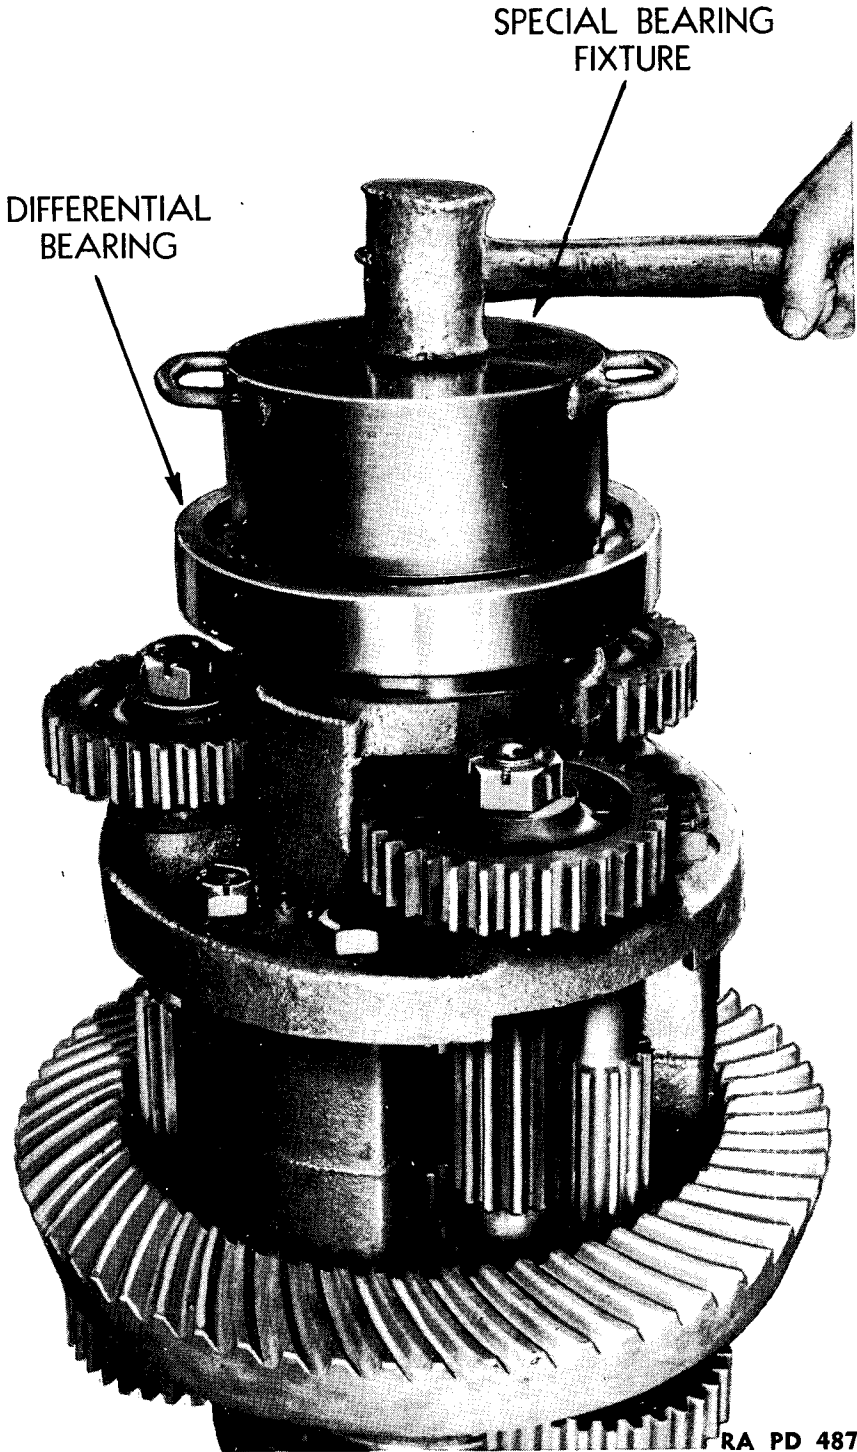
REPLACING DIFFERENTIAL BEARING
